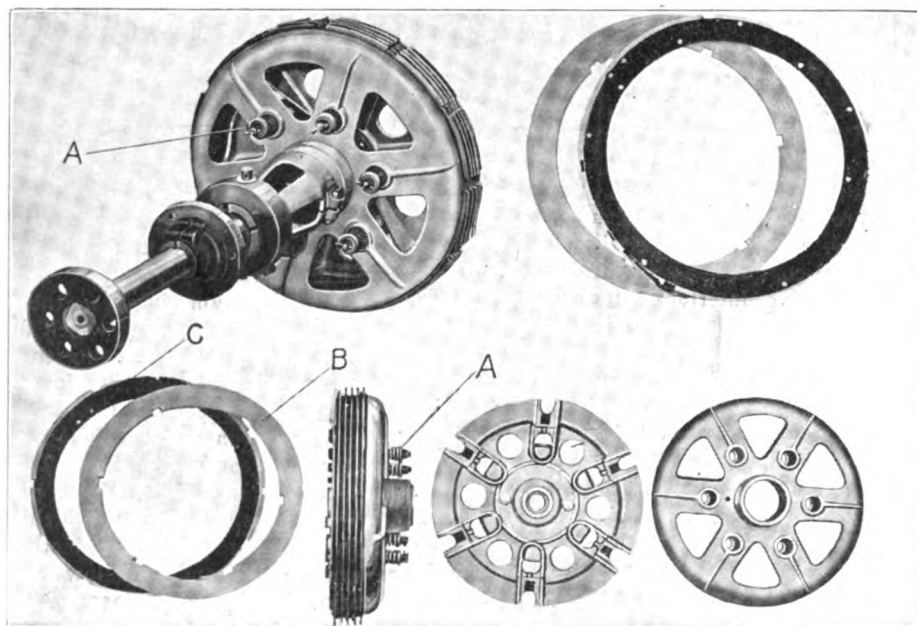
STEARNS DRY PLATE MULTIPLE DISK CLUTCH DISASSEMBLED
